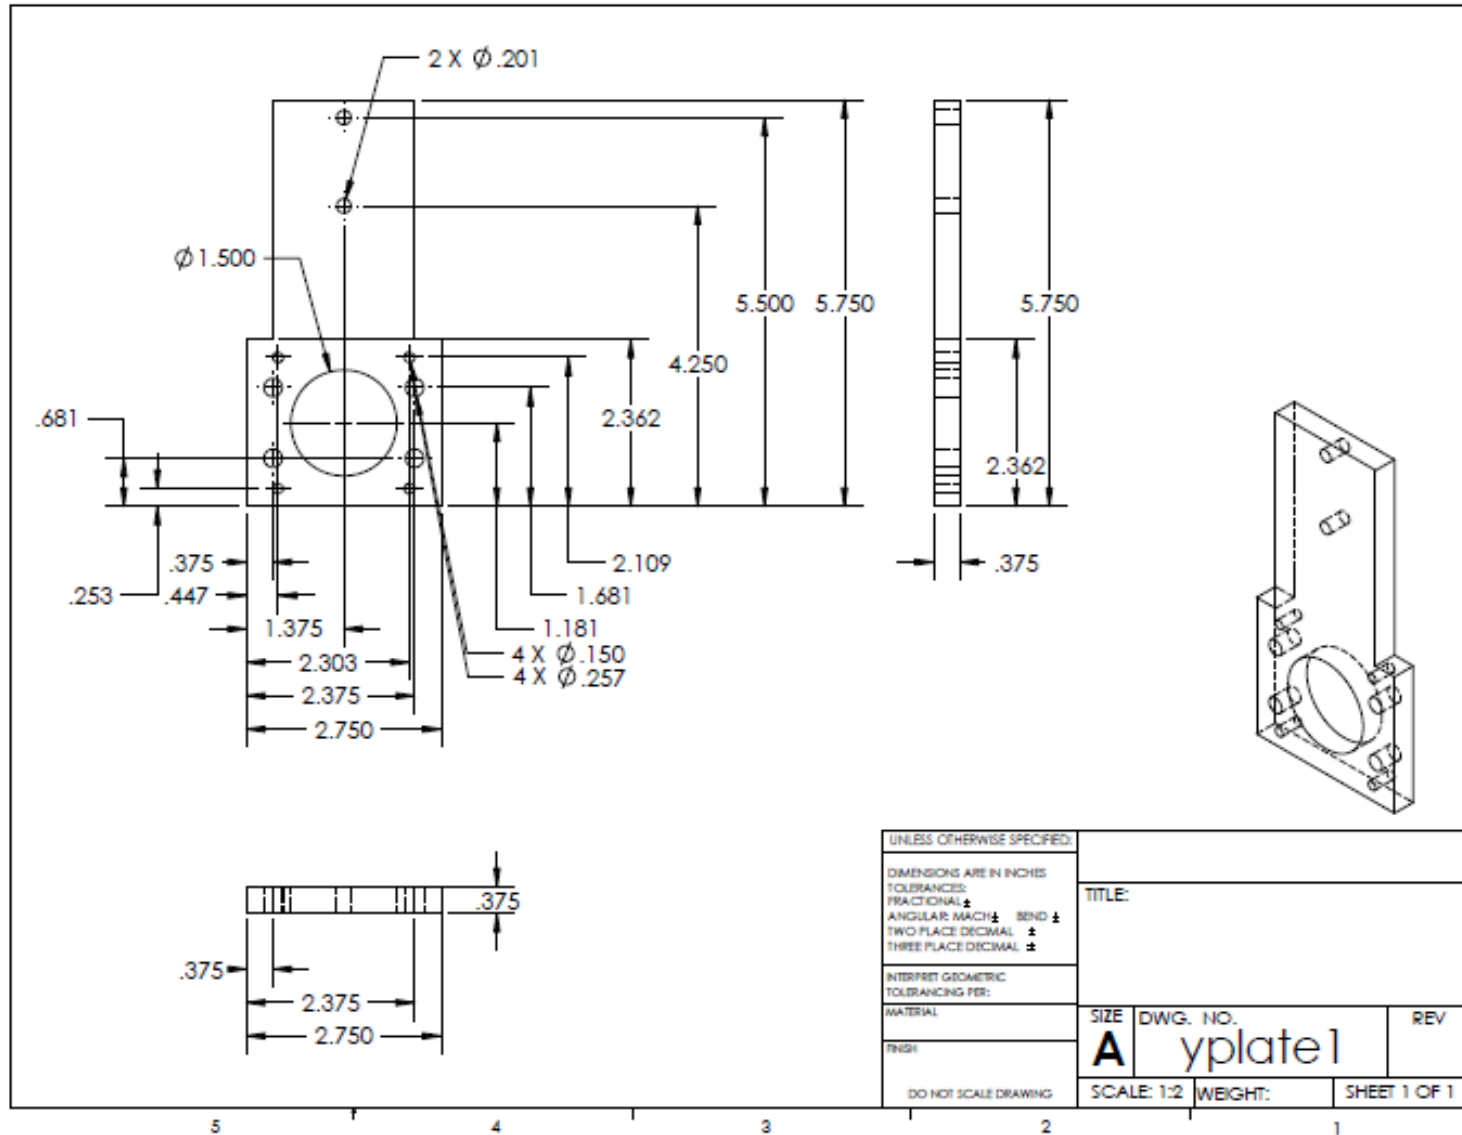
Engineering drawing of the Y-axis motor mount plate #1
